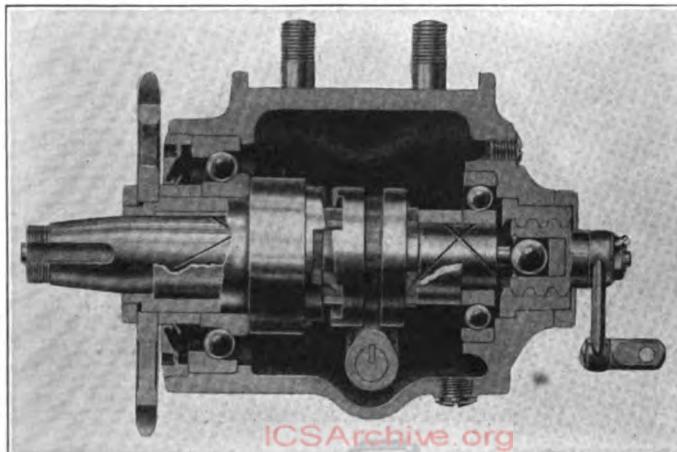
Sectional View of Reading-Standard Cone Clutch
